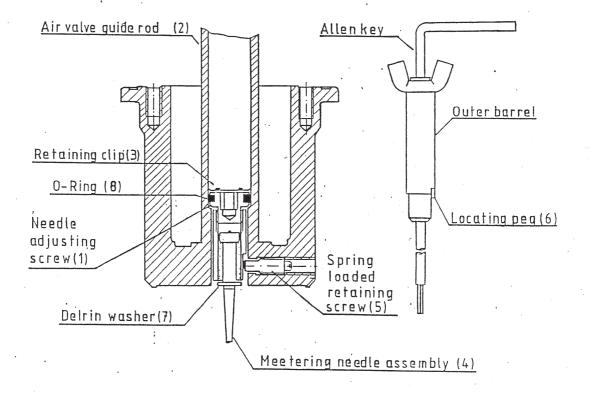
Sectional drawing of air valve assy. 150CD-3 and adjustment tool
